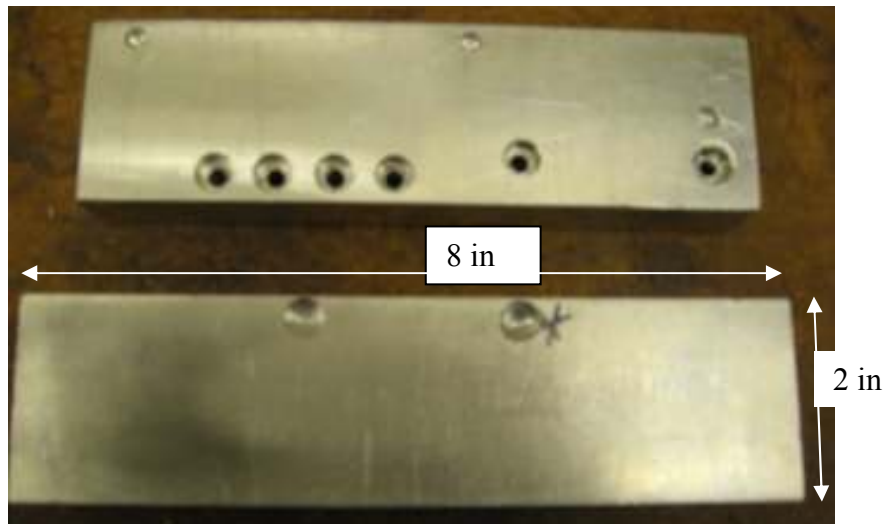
Photograph of Clips Used to Hold Robot while Milling
